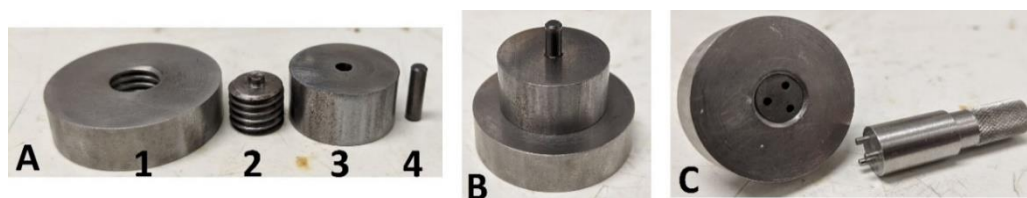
CPP press. Where A – disassembled press with 1 – press base with internal thread, 2 – plug with external thread, 3 – cylinder and 4 – piston, B – assembled press and C – bottom view of B with the tool for plug insertion & extraction.
